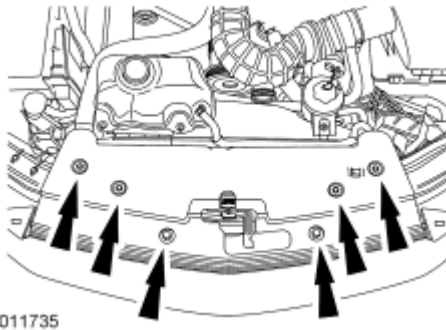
Locating Pin-Type Retainers And Radiator Sight Shield
